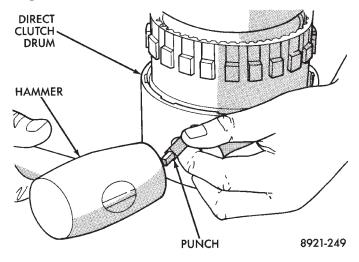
Marking Direct Clutch Drum And Annulus Gear For Assembly Alignment
